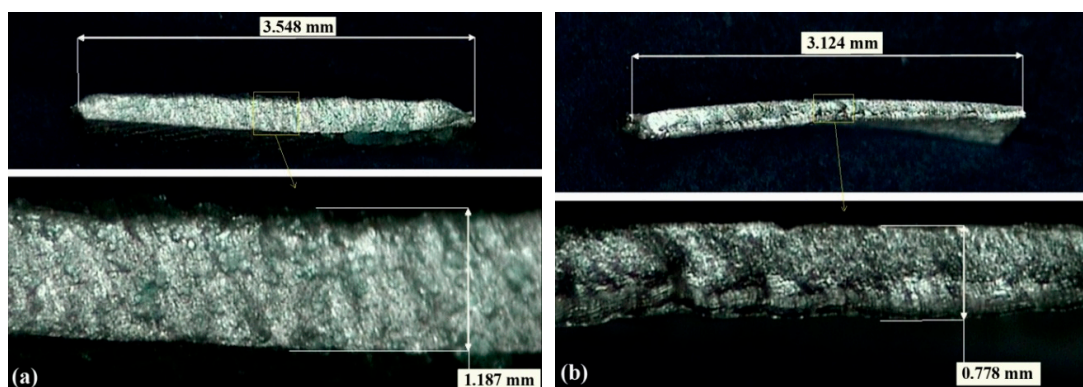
Presentation of chip cross section for different samples, (a) FSW zone of FS welded sample, and (b) FSV zone of FSV-welded sample.
